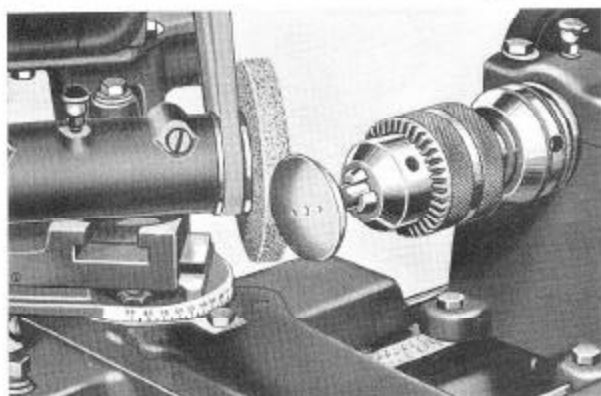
Close up of Valve Grinding. In the illustration above the guards for the grinding wheel and belt have been removed in order to give a better view of the emery grinding wheel.
